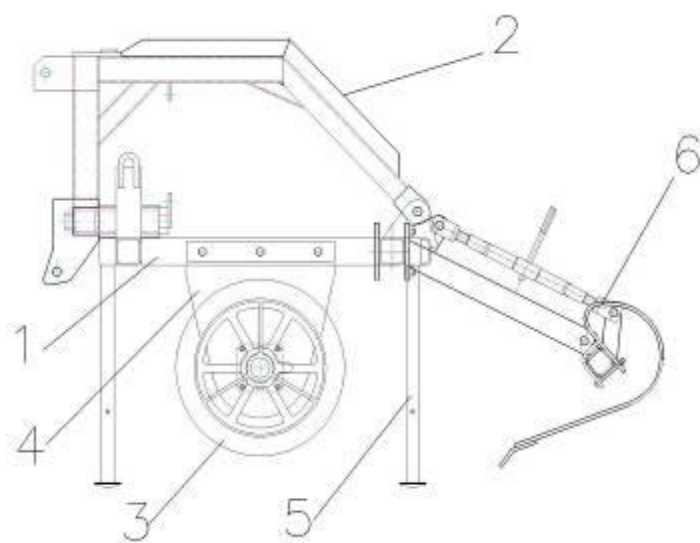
Design of the roller MCB/MCW 3.0 m: 1 - frame, 2 - drawbar, 3 - working wheels (Fig. 3), 4 - bearing plate, 5 - support foot, 6 - smoothing harrow (Fig. 5)
